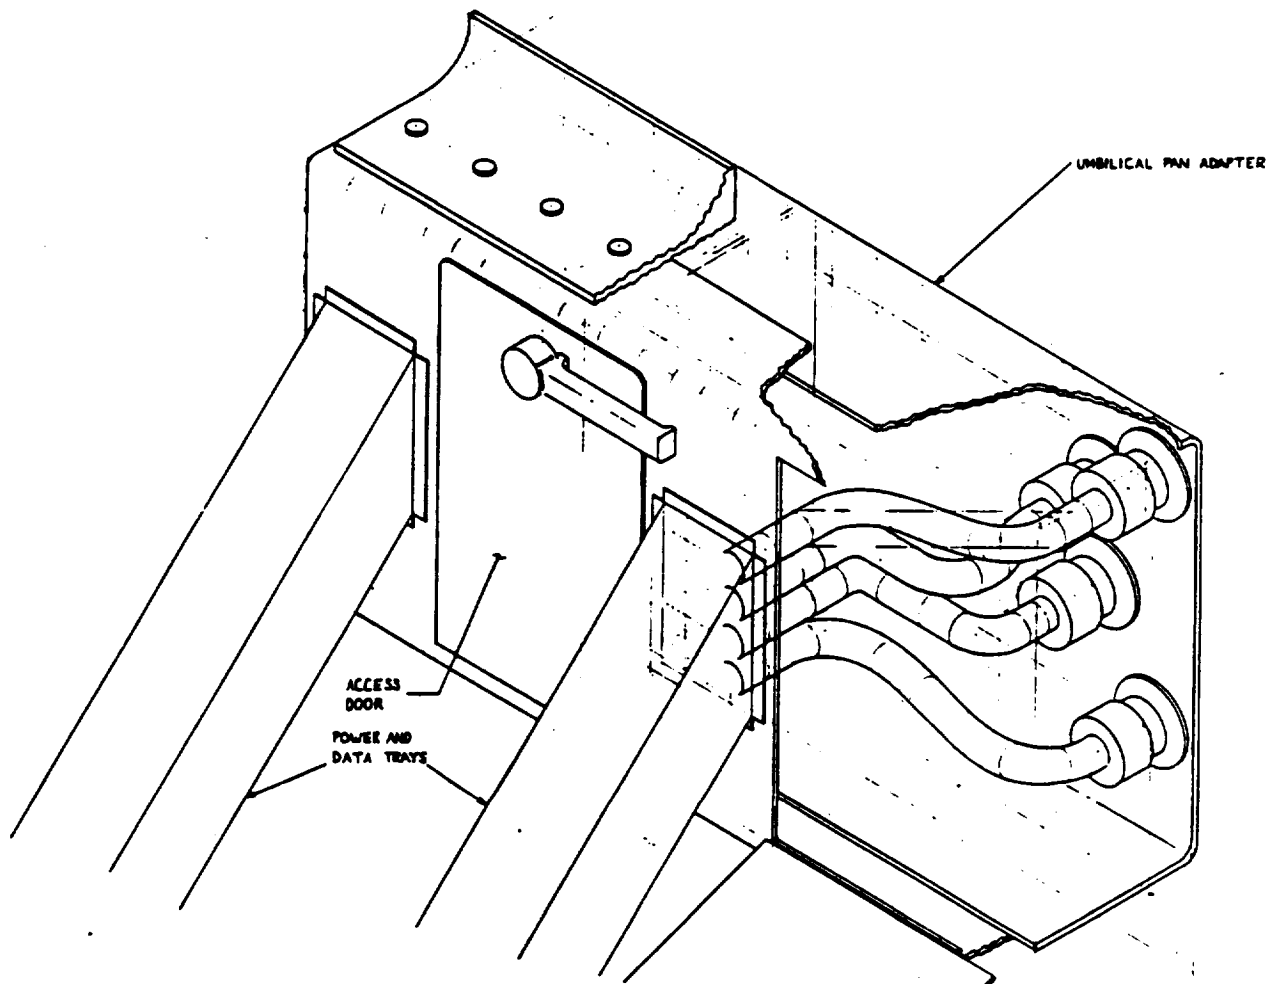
Umbilical Pan Adaptor Interfaces With Module Penetration Panel
